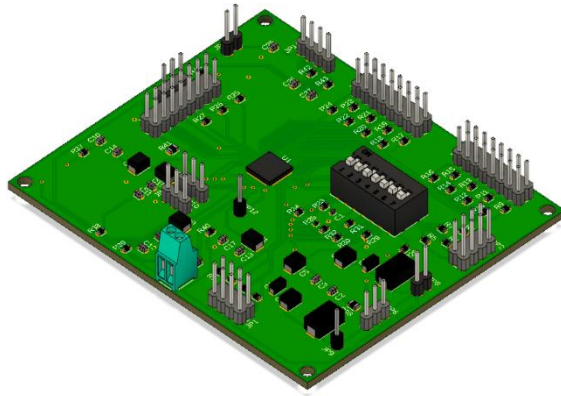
DS92LV2421 Serializer PCB 3D rendering
